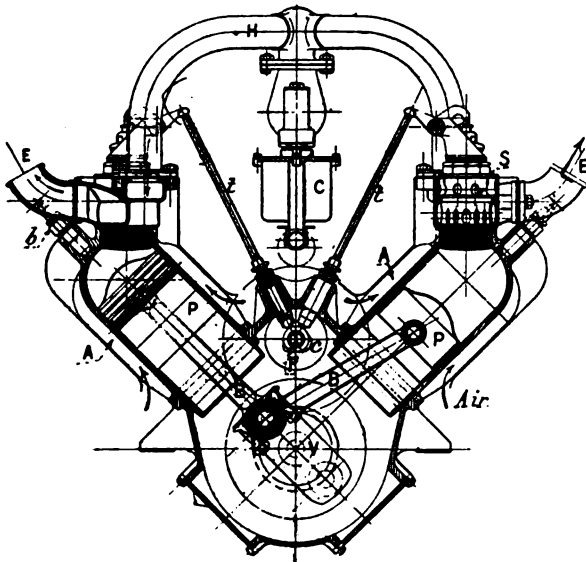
Cross Sectional View of Pipe 70-h.p. Aeronautical Engine.
